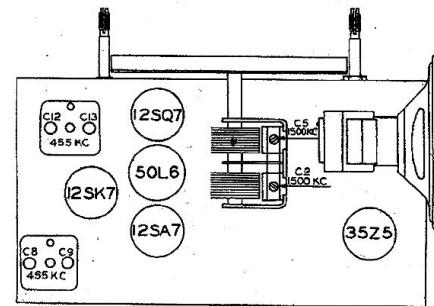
Majestic chassis layout diagram shows location of all adjustment trimmers.
